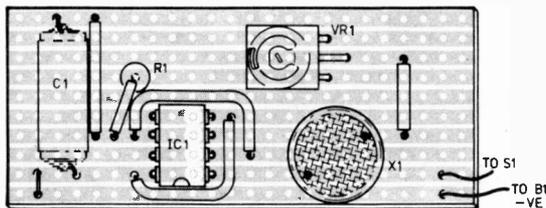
Component layout and Veroboard cuts for the transmitter of Fig. 2
